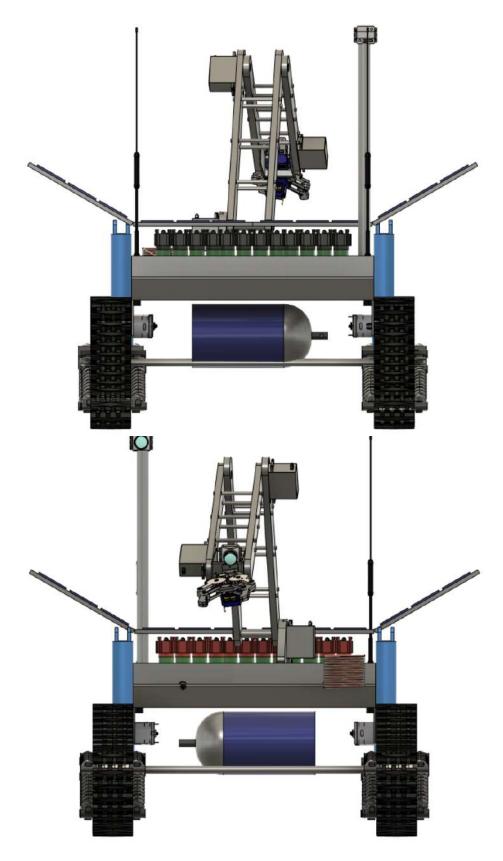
Back and Front View of Prototype with Hydraulic Fluid Cylinder
